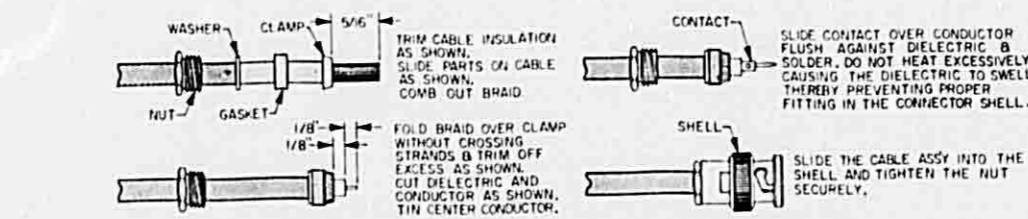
030-0005-00 CONNECTOR ASSEMBLY
